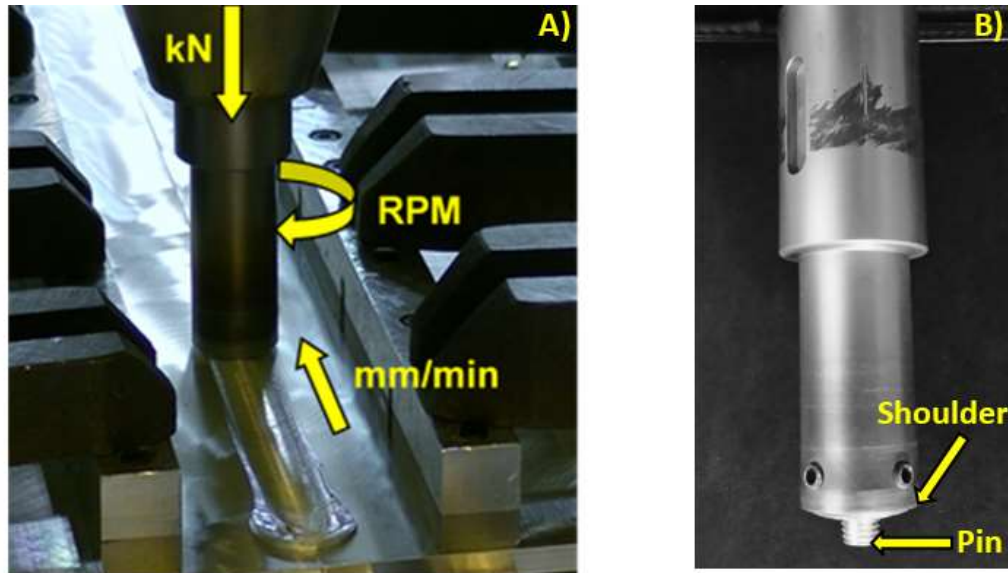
A) FSW configuration employed in this work during operation illustrating the three process parameters that compose a weld schedule; B) an image of the fixed pin tool illustrating pin and shoulder.
